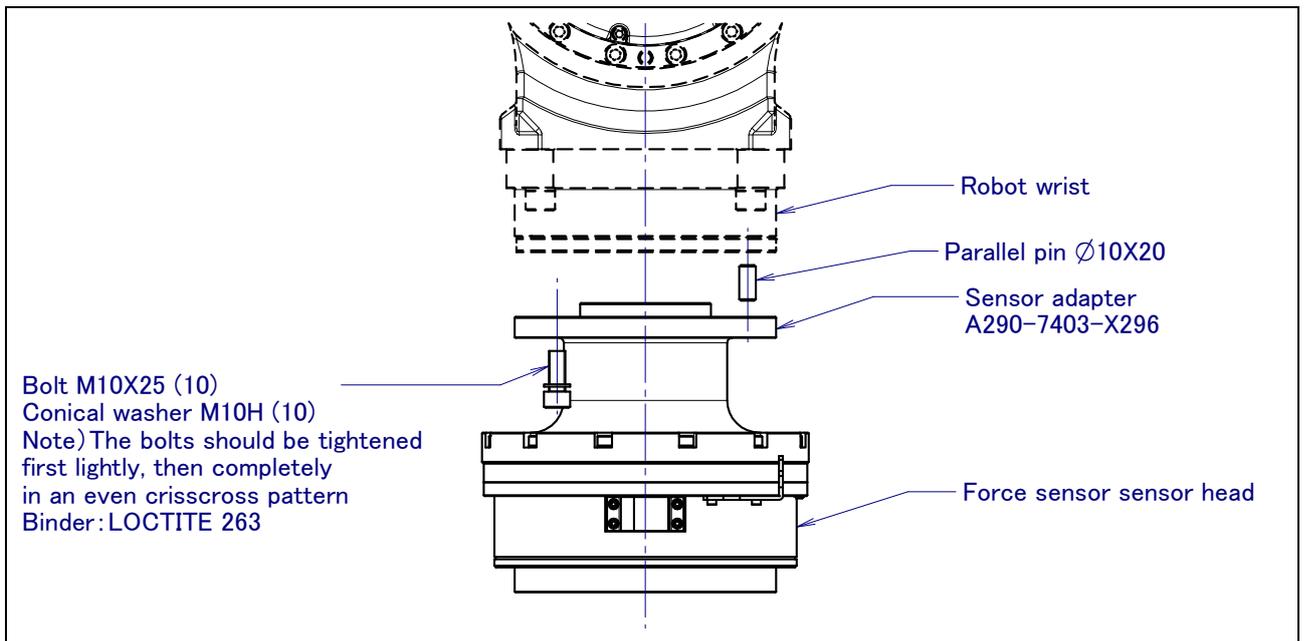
(g) Replacing the force sensor, sensor head and adapter (R-2000iB+FS-250iA with adapter which does not need torque wrench)
